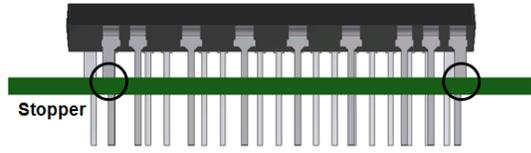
Process Flow of Soldering a SPM 45H Package (when heat sink mounting first)
